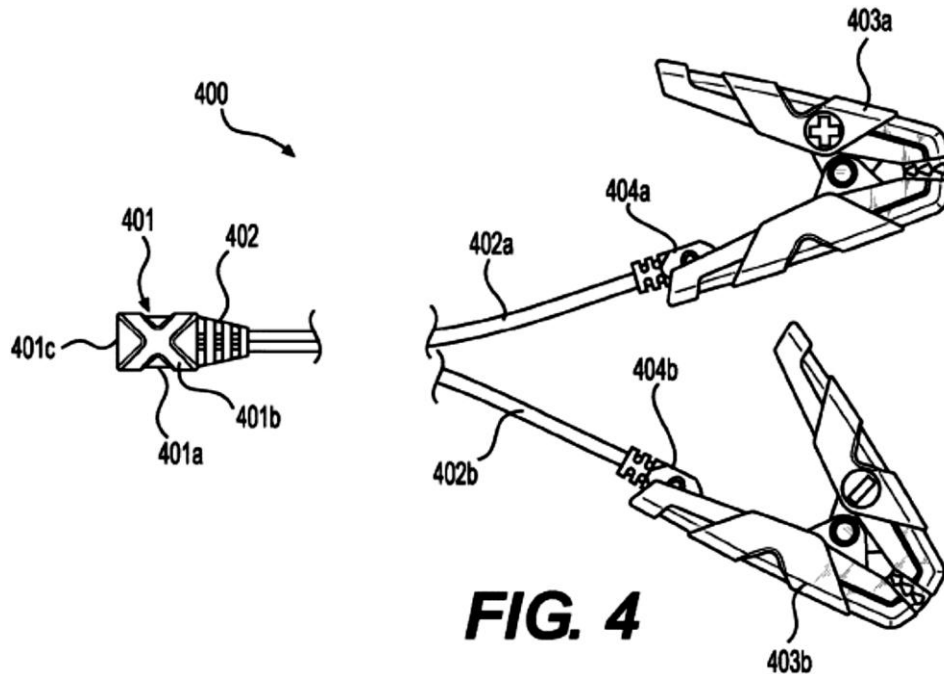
“is a plan view of a jumper cable.” *Id.* at 3:65–67. Figure 4 illustrates the following: plug 401 configured to plug into 12 volt output port 303 of handheld device 300; a pair of cables 402a, 402b integrated with plug 401 (having body 401a, surface protrusion 401b, and flat end 401c) and respectively connected to positive and negative polarity battery terminal clamps 403a, 403b via ring terminals 404a, 404b. *Id.* at 7:55–60. Handheld booster device 300 is connected to a vehicle battery by connecting the plug 401 into the output port 303 and connecting the battery clamps 403a, 403b to respective terminals of the battery. *Id.* at 8:2–11.
